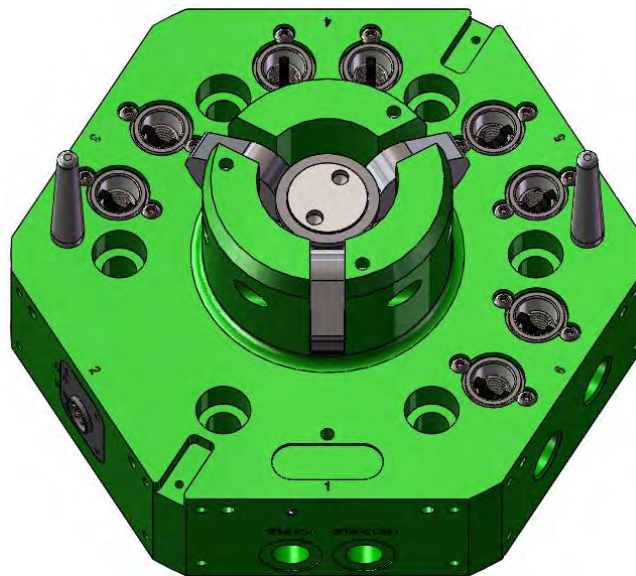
E125LP Robot Adaptor Visual Inspection
